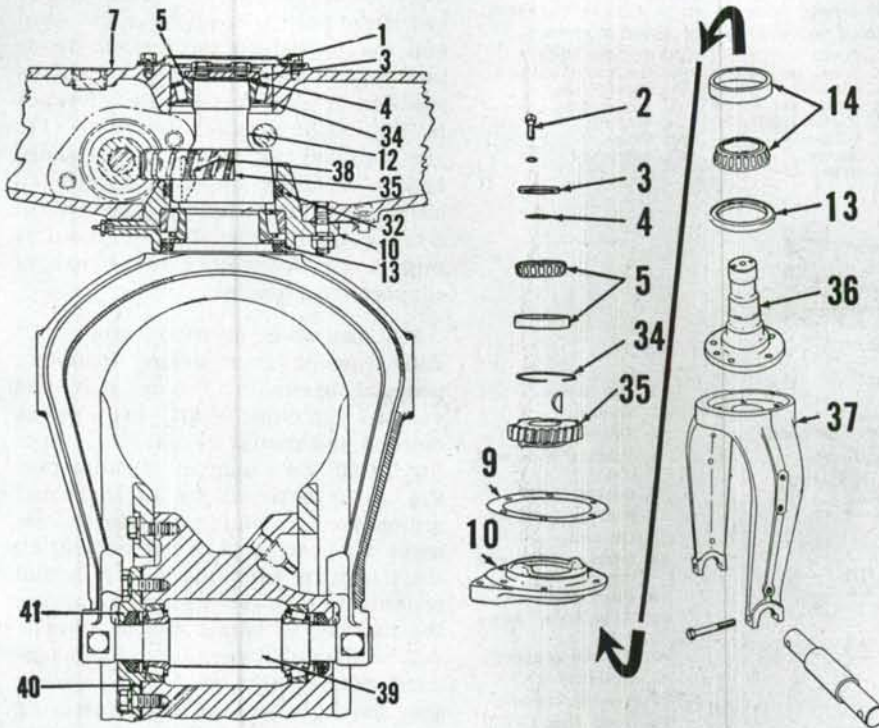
Models RC and WC single wheel tricycle version front support and main steering gear assembly. WD models prior to serial WD 25129 are similar.
